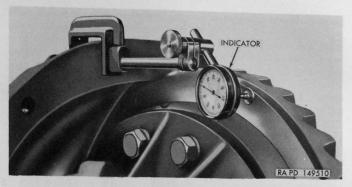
Checking drive gear runout with dial indicator 41-I-100.
